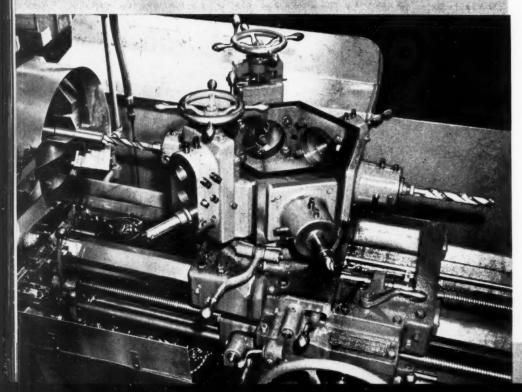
Drilling and Boring Cuts are Taken in the Shank of the Wing Terminals with the Turret Lathe Set-up Here Shown
